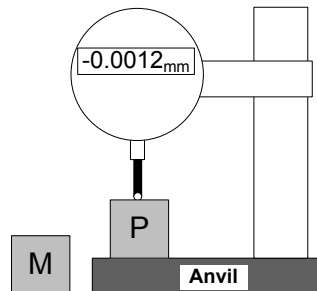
Initializing a length comparator, and measuring a part of unknown size
